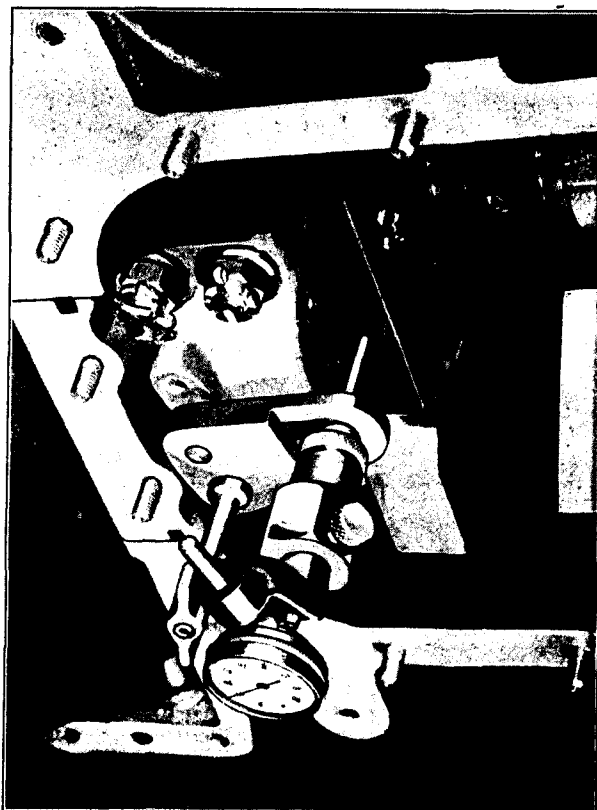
Indicating Rear Main Bearing. Indicator 196-B and Holder 65530 with Adapters A and C
